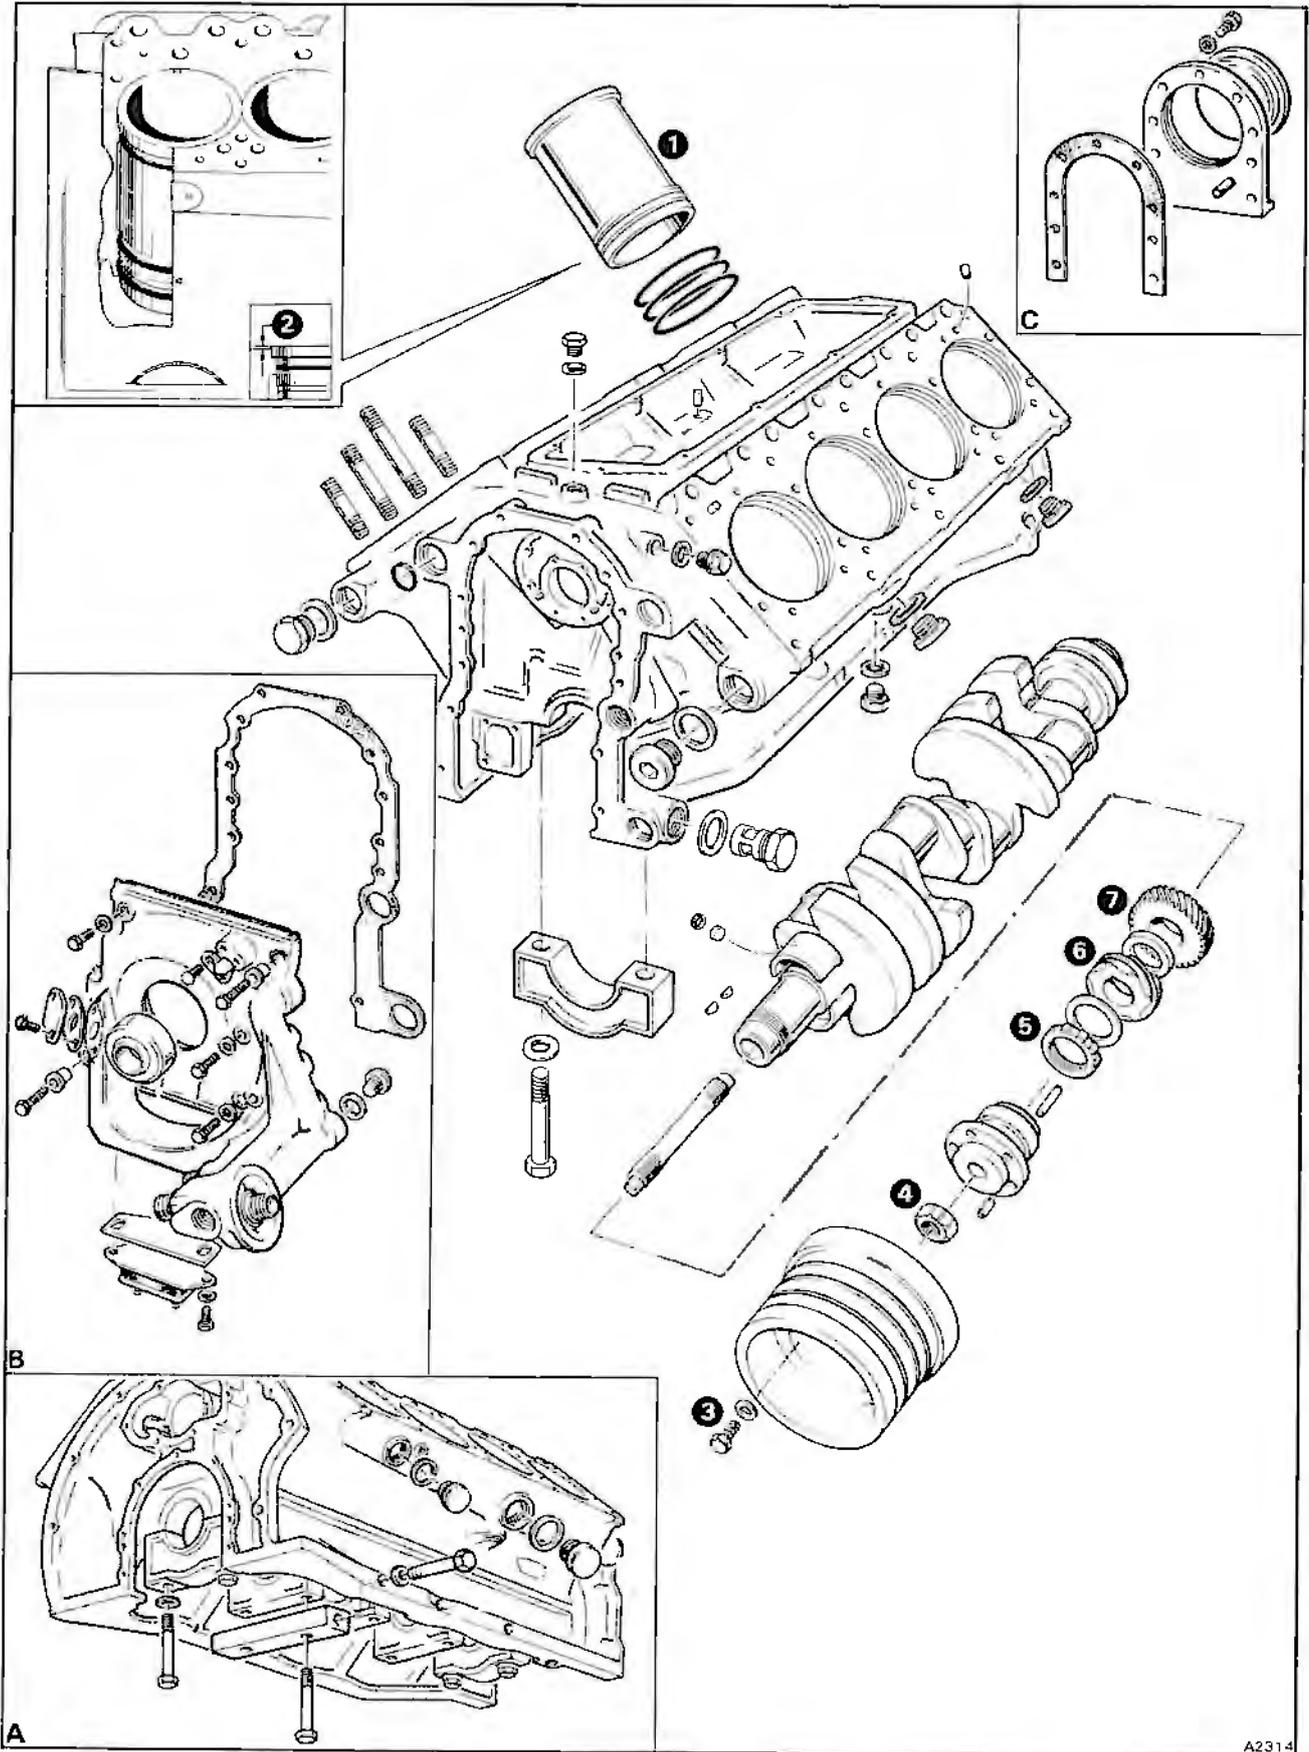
Crankcase, crankshaft, and cylinder liners
